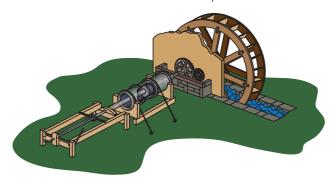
John Wilkinson's boring machine. It was first used to machine cannon bores, then cylinders for steam engines.
